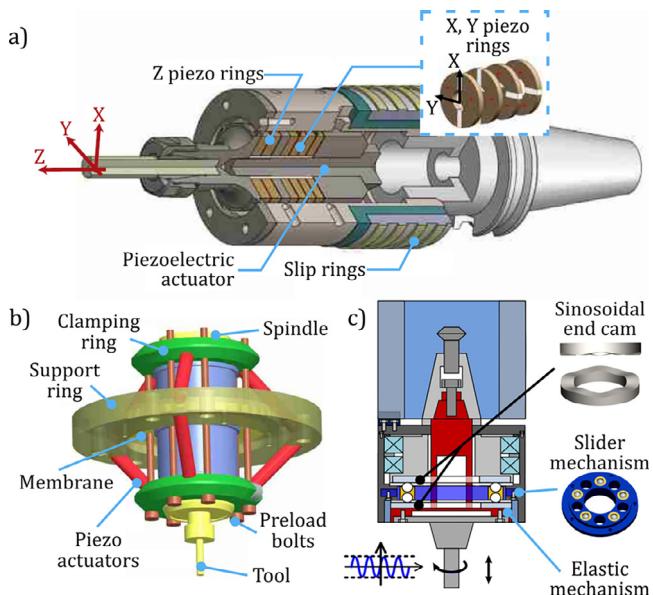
Prototype actuator tooling systems: a) piezoelectric tool holder for ultrasonic vibration [99], b) adaptronic spindle system with piezoelectric actuators [66,68], c) mechanically actuated tool holder [130].
